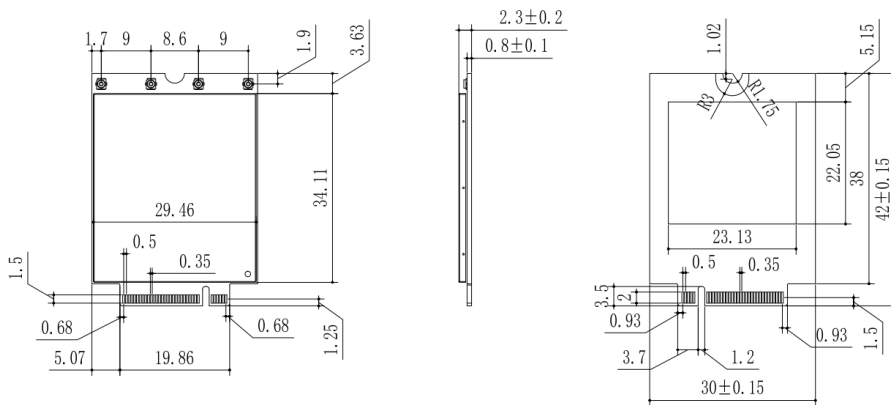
Mechanical Dimensions of EM120R-GL&EM160R-GL (Unit: mm)
